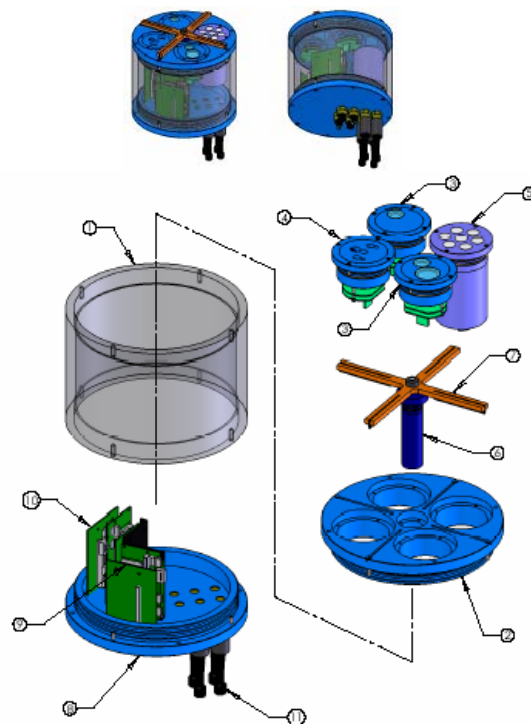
The integrated bio-optical sensor system (BOSS) in side view (top panel) and in an exploded view (bottom panel). Labeled components are 1) pressure housing, 2) top end flange with holes for optical instrumentation, 3) SAM optical heads and board sets, 4) ECO style optical head with fluorescence and backscattering sensors, 5) Satlantic OCR507 irradiance sensor optical block, 6) wiper motor housing in pressure housing, 7) anti-fouling bio-wiper, 8) bottom end flange, 9) winch motor controller electronics, 10) primary package controller electronics, and 11) BOSS bulkhead connectors.
